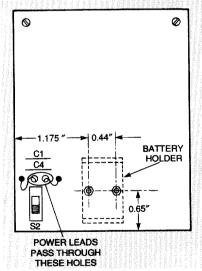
DRILLING GUIDE. Four No. 2 screws and nuts hold the plastic backplate and battery holder in place.
